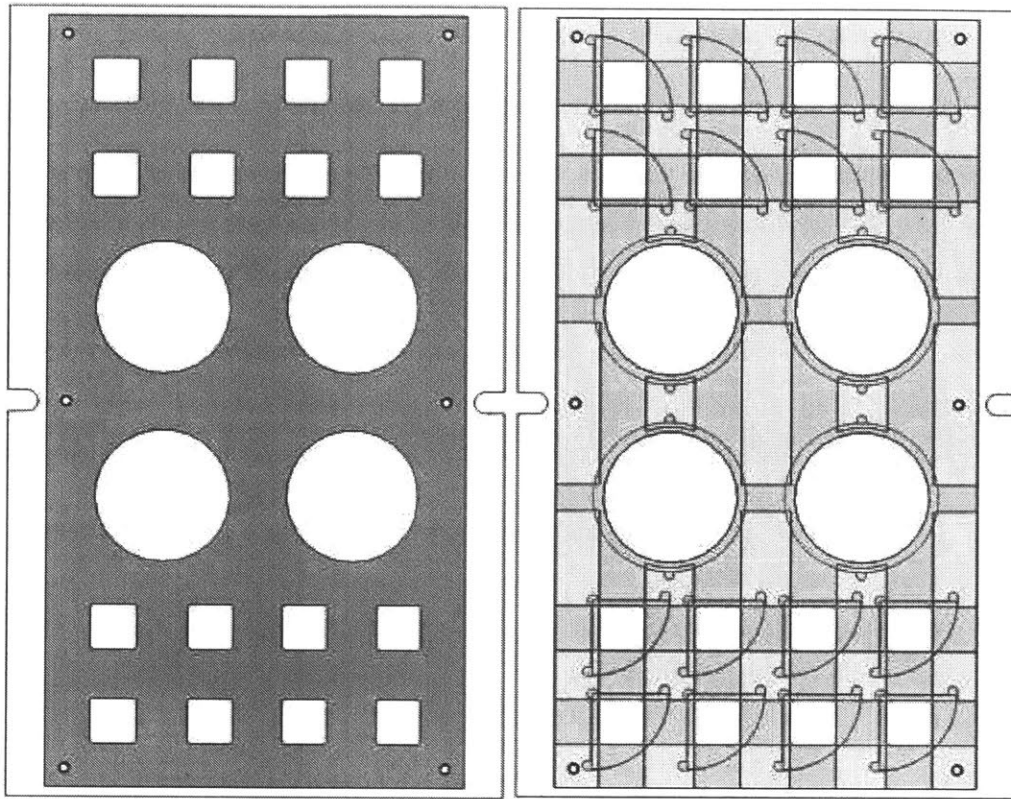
Assembly of fixture device to hold wafer substrates. On the left shows the full assembly and on the right is the full assembly with the top mask plate made transparent.
